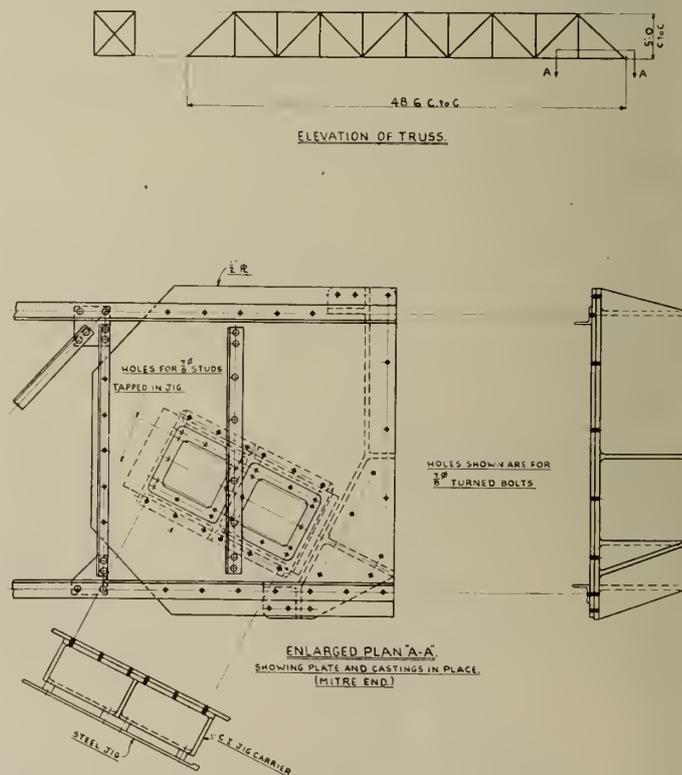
Jigs for Girders—82-foot Leaves.
